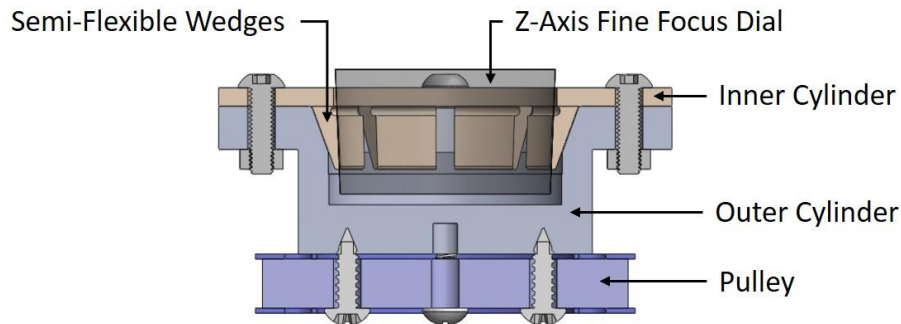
Z-Axis Dial Adapter Final Design CAD Model
